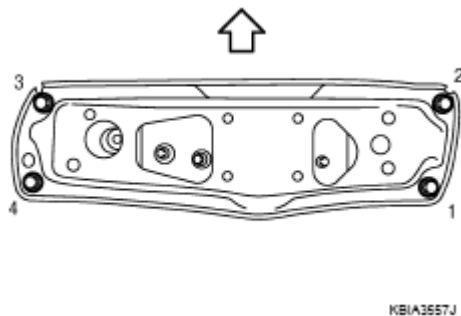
Identifying Rear Engine Mounting Member Bolts Tightening Sequence
